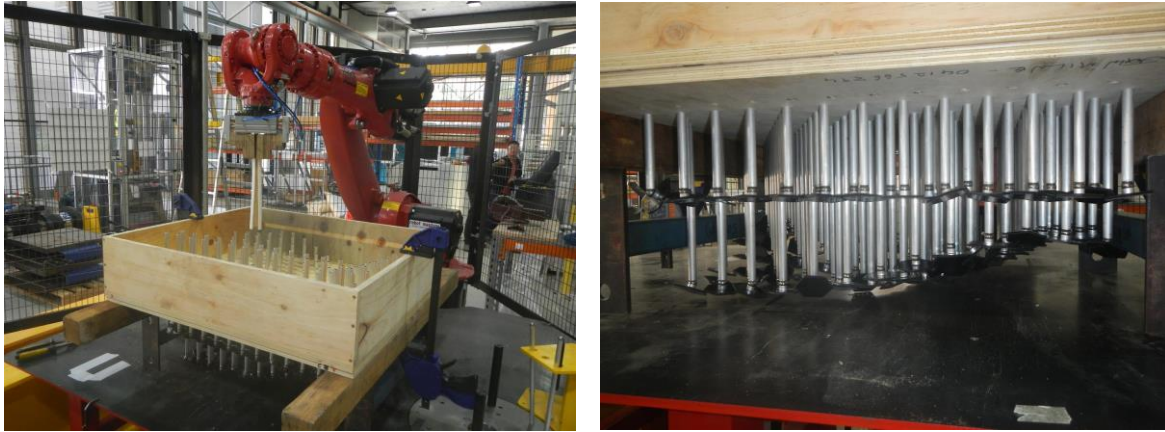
Assembly of equipment (top) and progression of mould setting (bottom)
